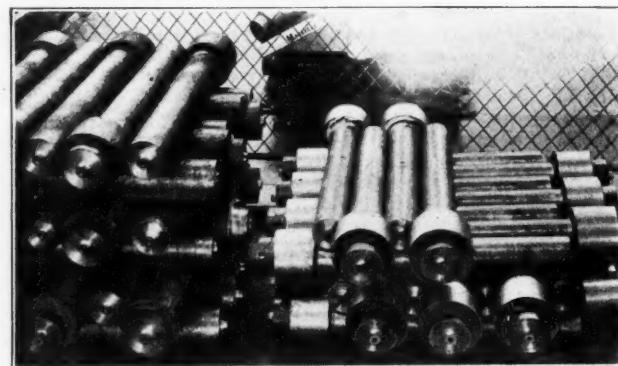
Pile of Lathe Spindle Forgings Rough-turned during Experiments.
